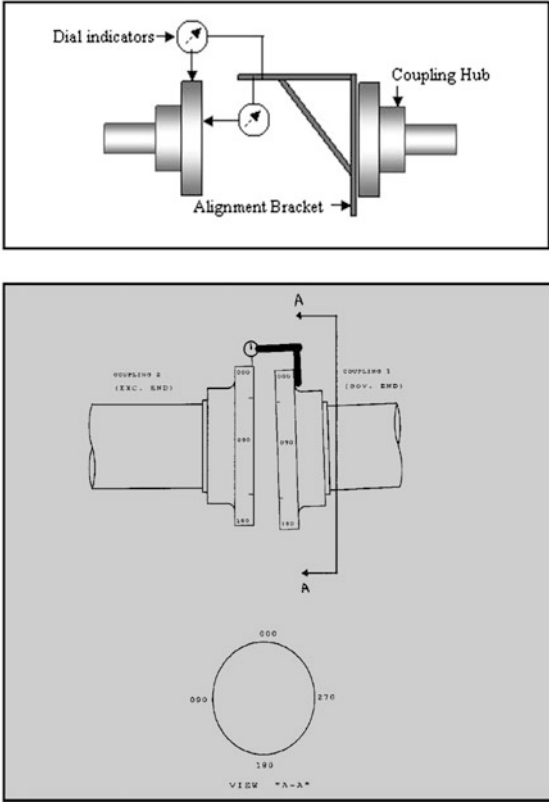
Dial indicator measures face readings (Courtesy of Siemens)
